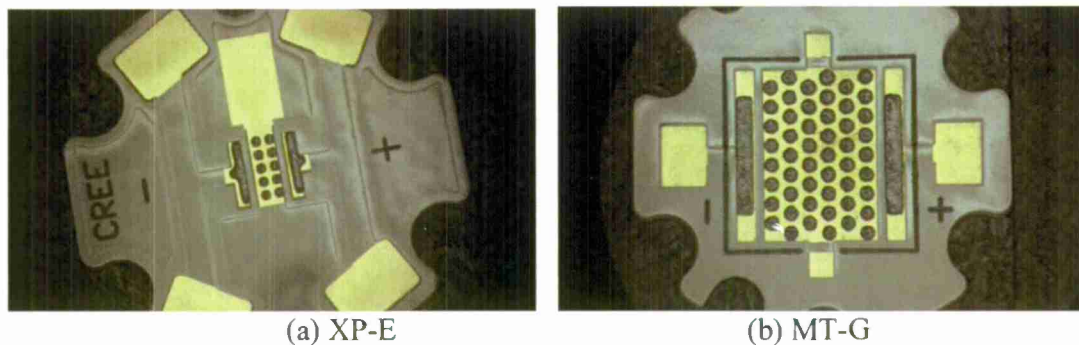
MCPCB with printed solder paste with stencil designed for this study
